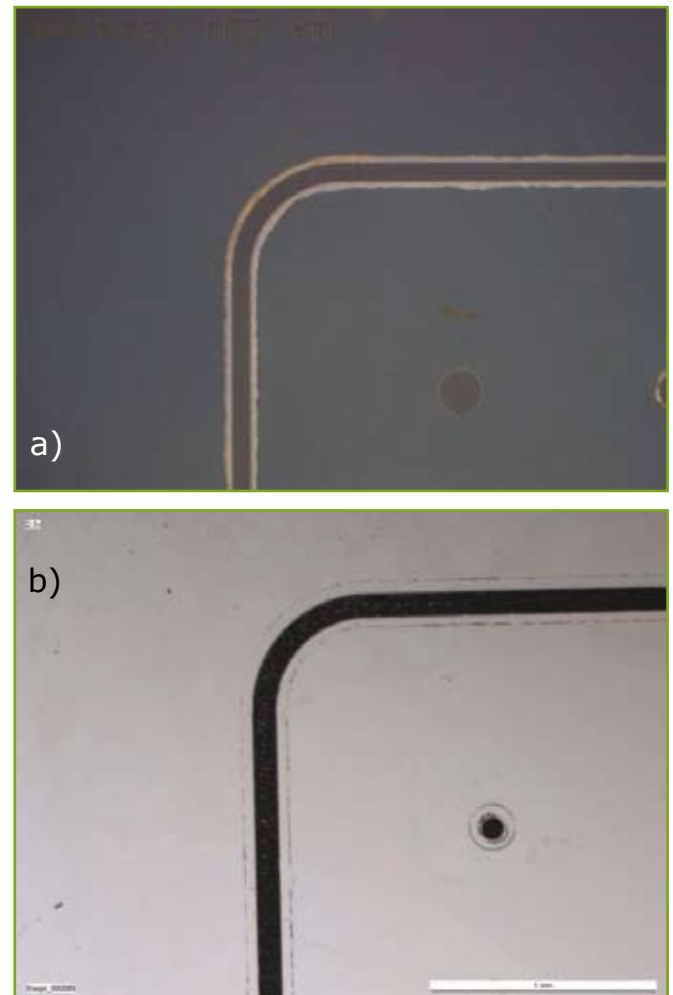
Optical observation of the ring after assembly a) and after lid removal b).
